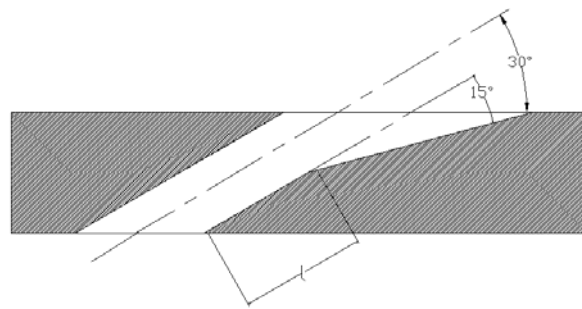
Side view section from blade surface for shaped diffuser hole
